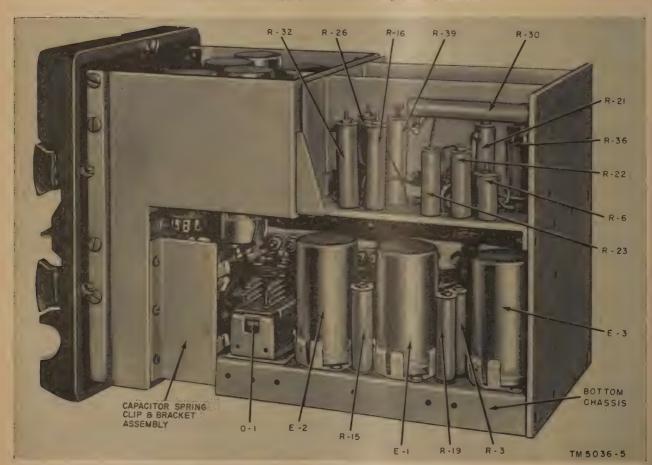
Power Supply PP-112/GR, right-hand side view of chassis.
